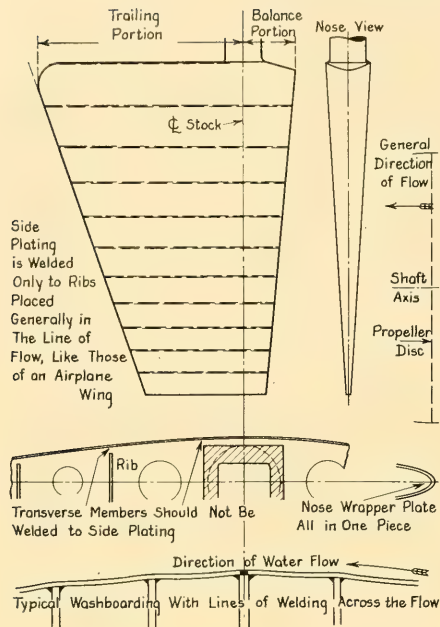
G RUDDER STRUCTURE WITH ONE SYSTEM OF WELDS PARALLEL TO THE FLOW
